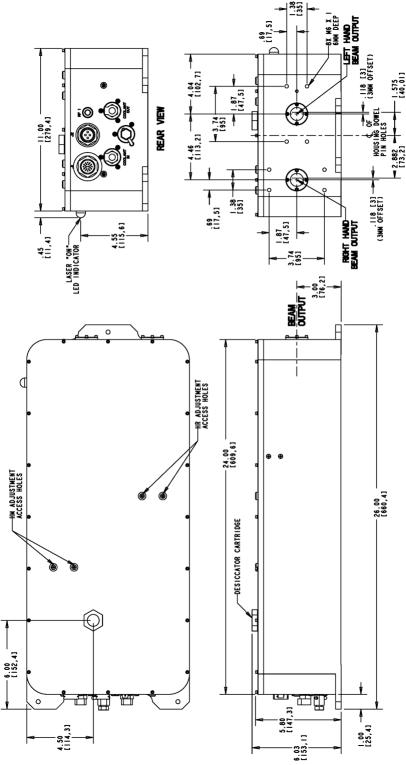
Patara Laser Head Dimensions, Sheet 1
